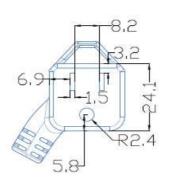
Engineering dimension drawing for 40106 (unit:mm)
